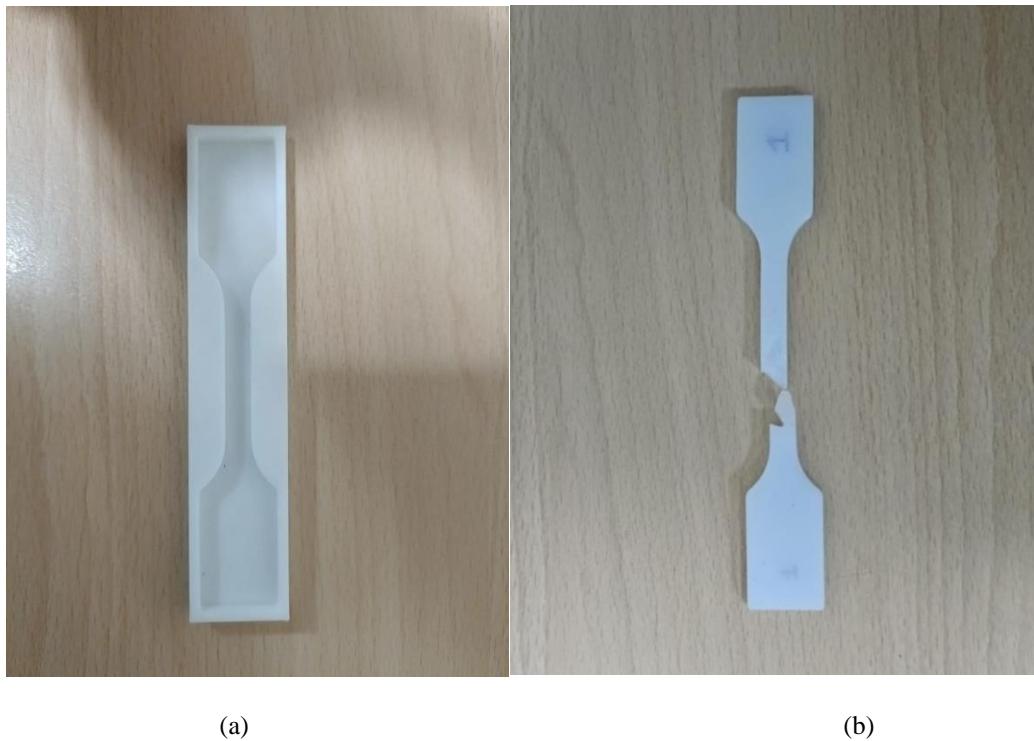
(a) Dog Bone Sample Mould (b) Dog Bone Sample after Testing
